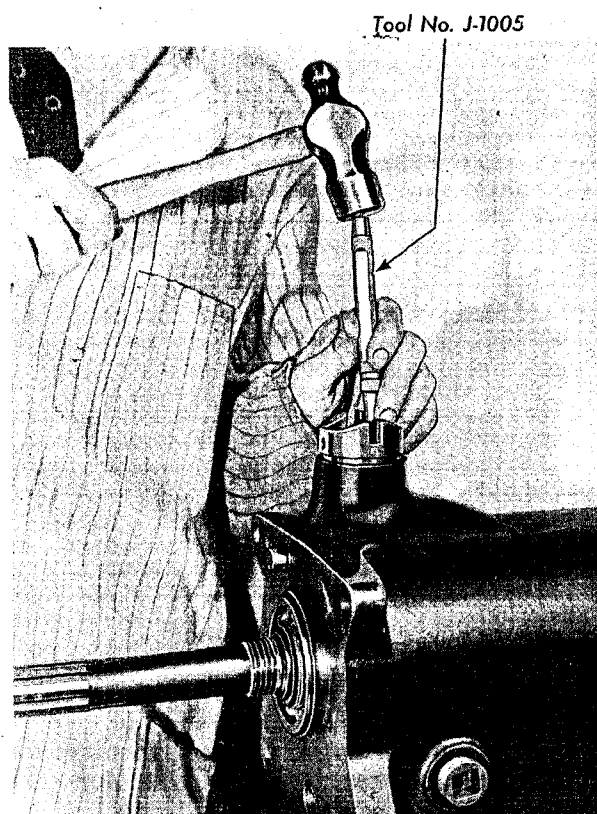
Installing Pin for High and Intermediate Shaft and Fork
